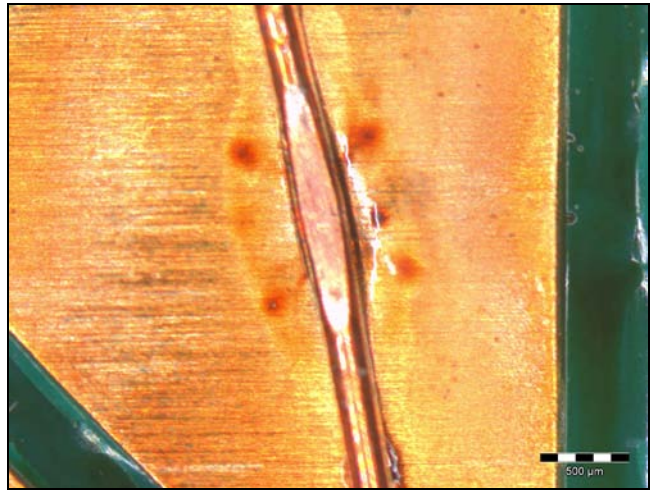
Electronics Application - Welded Enamelled Copper Wire Diameter 50 µm.
